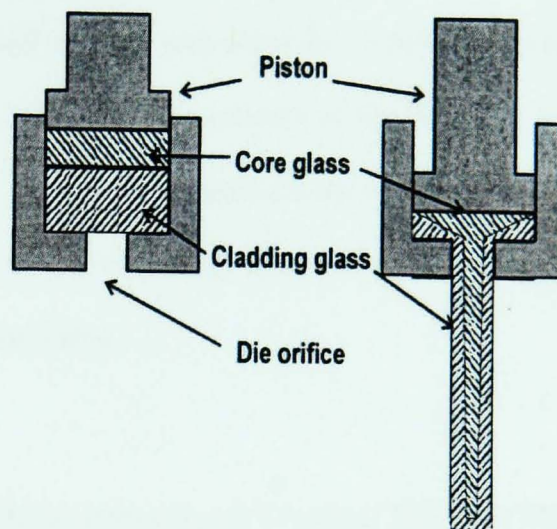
Schematic diagram of extrusion technique to produce a inorganic glass core / cladding preform [106].
